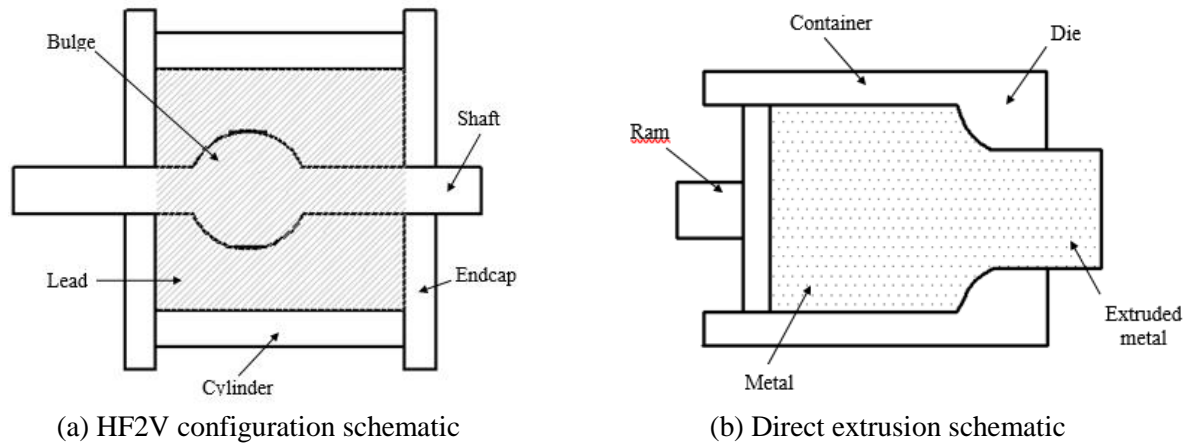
Key geometric parts in HF2V damper and Direct extrusion
